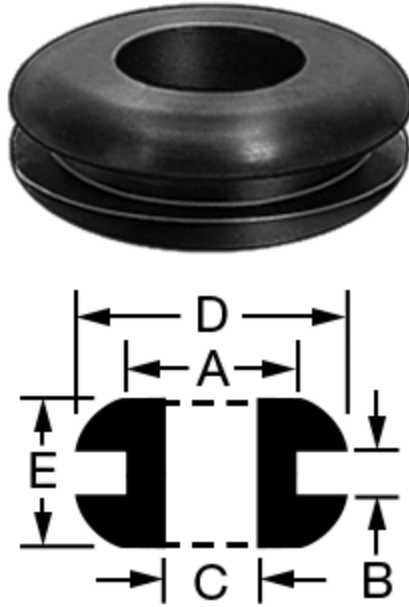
Shows a picture of the type of rubber grommet that will be used.
